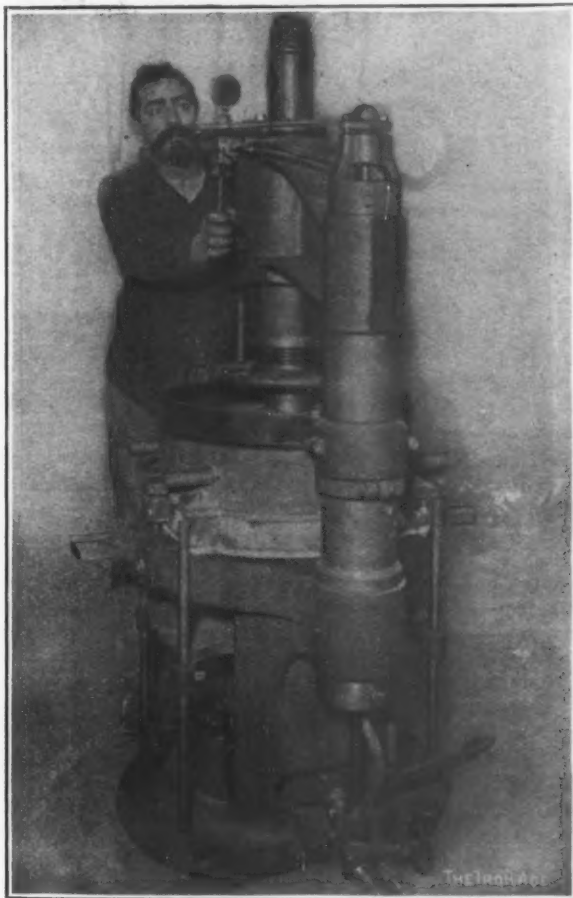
Molding Machine with Swinging Head.—Ramming the Mold.
